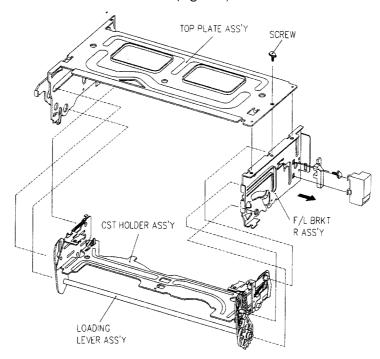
DISASSEMBLY OF THE FRONT LOADING ASS'Y
